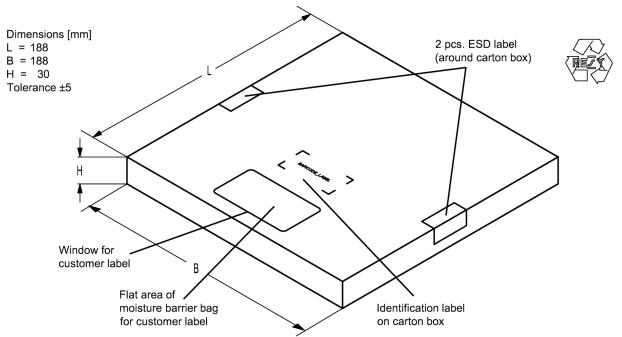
Drawing of folding box for reel with diameter of 180 mm.
